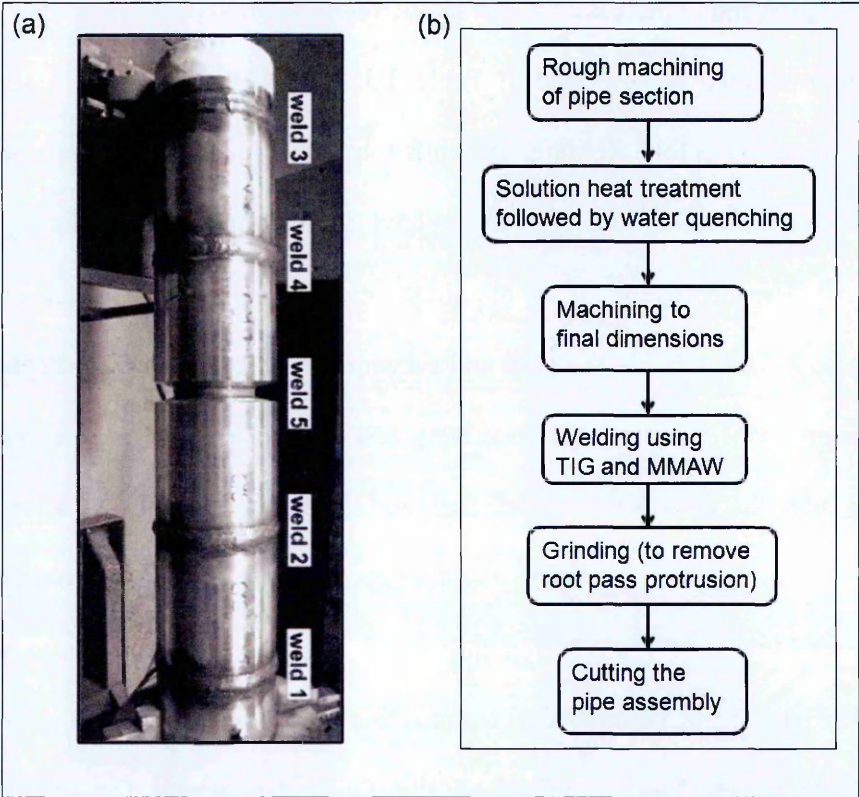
(a) Photograph of the Esshete 1250 pipe assembly containing series of girth welds (b) Manufacturing history of the welded Esshete pipe weldments [17, 18].
